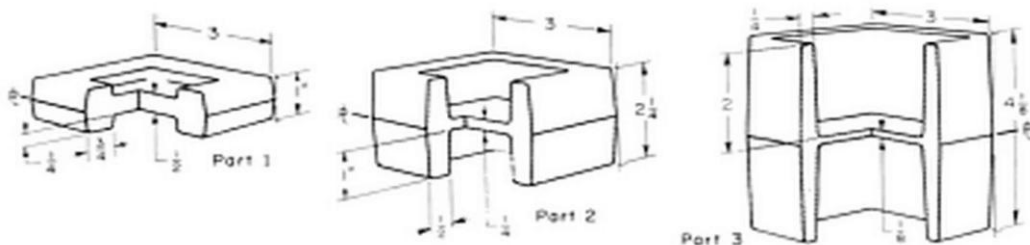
Three degrees of forging severity. Dimensions given in inches [3].
